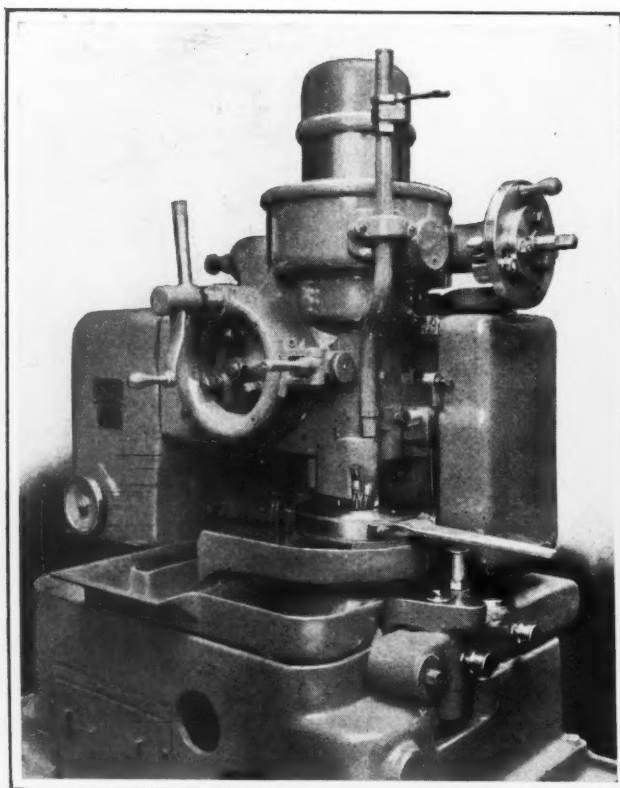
Fellows Gear Shaper Equipped with "Side-trimming" Attachment
